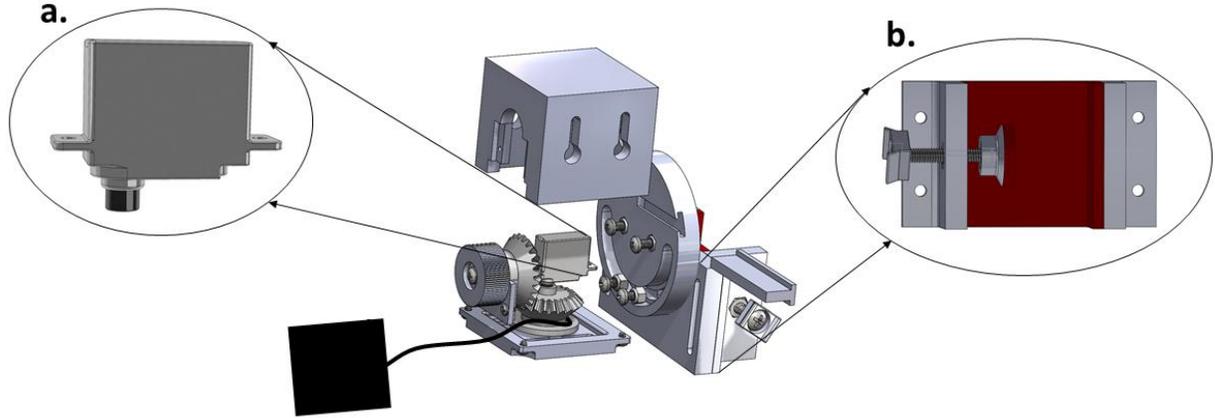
3D solid model view (exploded) of the skin stretch device. a) Nano servo motor fixed to a bevel gear and a disc used to pull on a thread attached to elastic sports tape. b) 3D printed clamp used to affix the skin stretch device to a chair.
